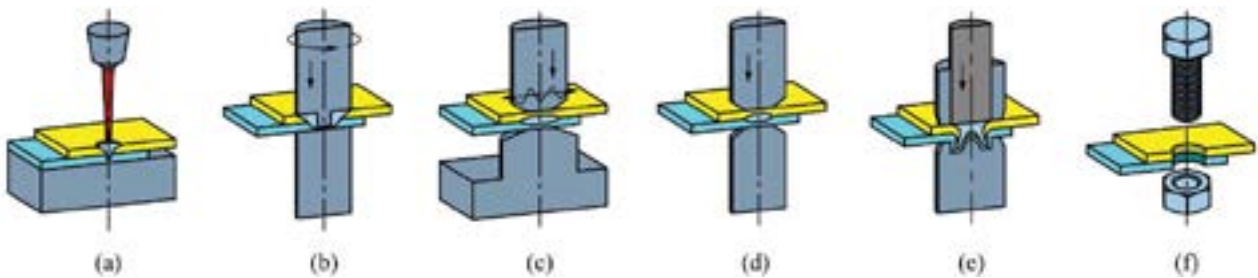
Joining processes for assembling hybrid busbars: (a) laser beam welding, (b) friction stir spot welding, (c) ultrasonic welding, (d) resistance spot welding, (e) self-pierce riveting and (f) fastening.
